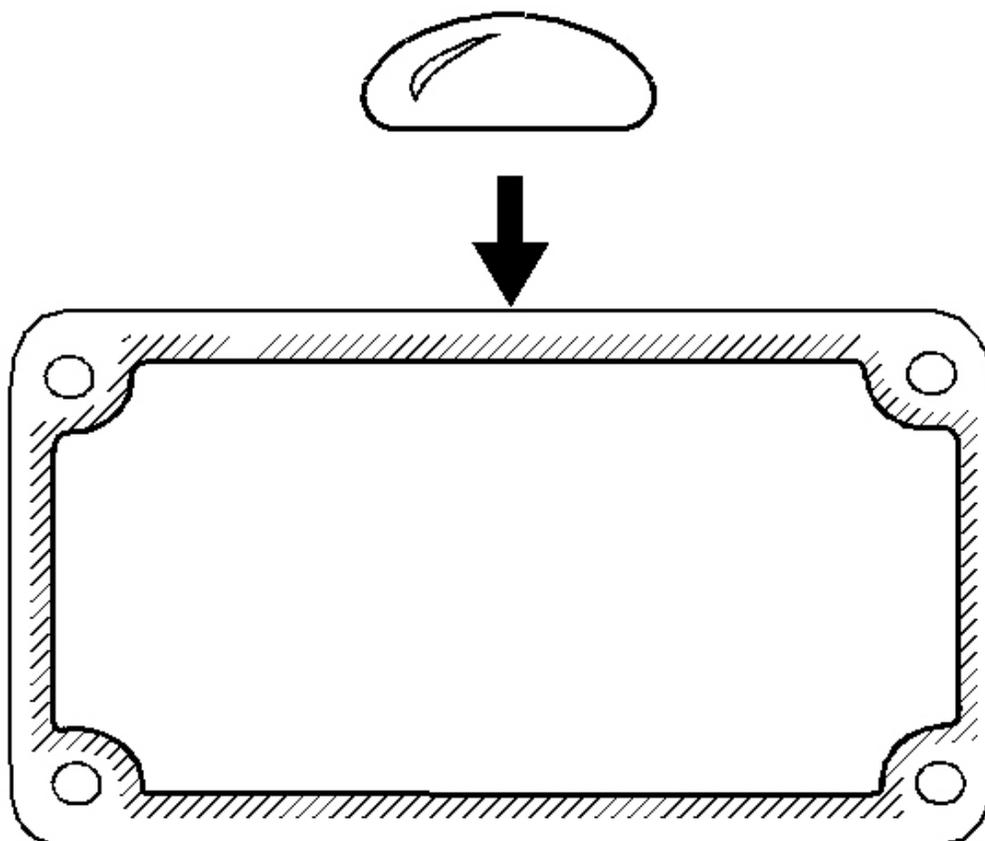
Applying Sealer To Mating Surface Of Cover Plate
